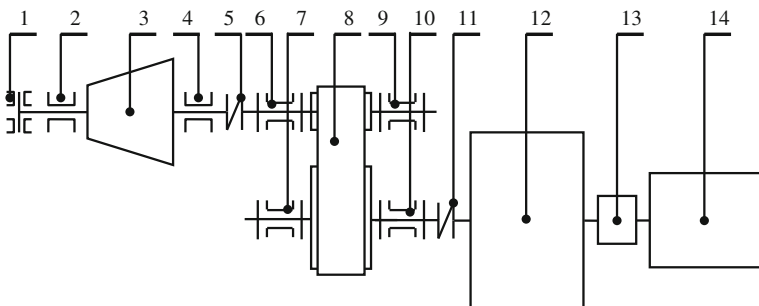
Configuration scheme of the solution variant 2 (belt transmission and planetary gearbox). 1, 2, 4, 6, 7, 9, 10 bearings; 3 turbine; 5, 11 elastic couplings; 8 belt; 12 planetary gearbox; 13 gear coupling; 14 electric generator
